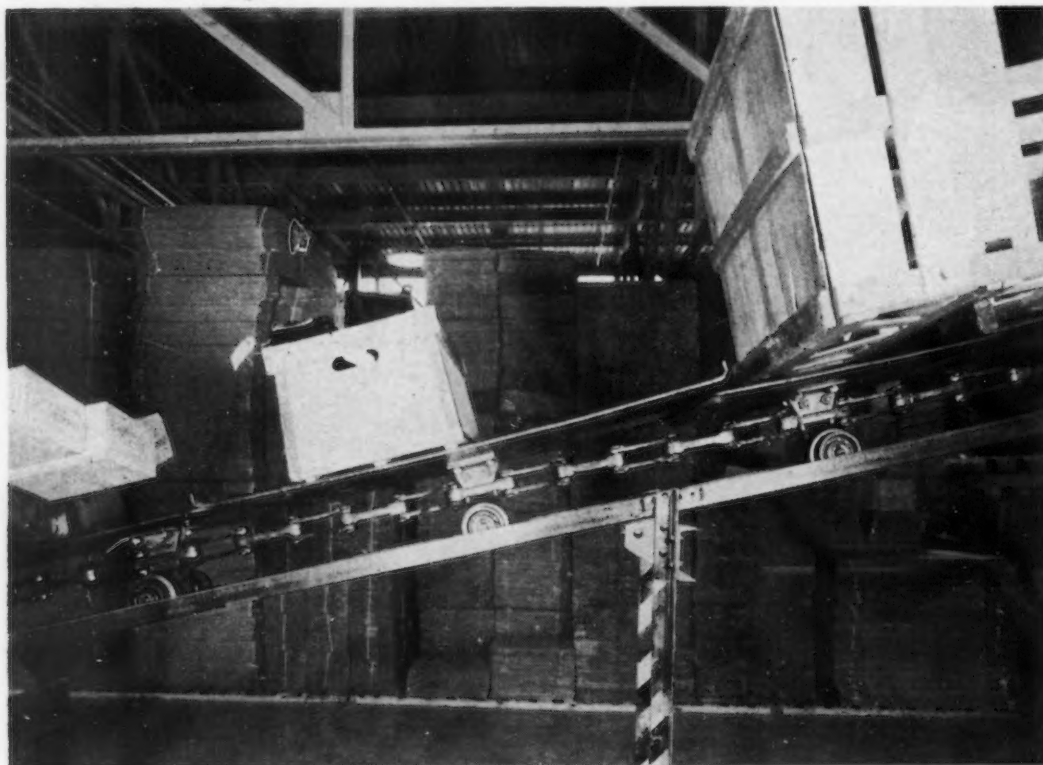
Close-up of a typical Palmer-Bee continuous chain package conveyor, similar in general principle to the automotive assembly line conveyor.
